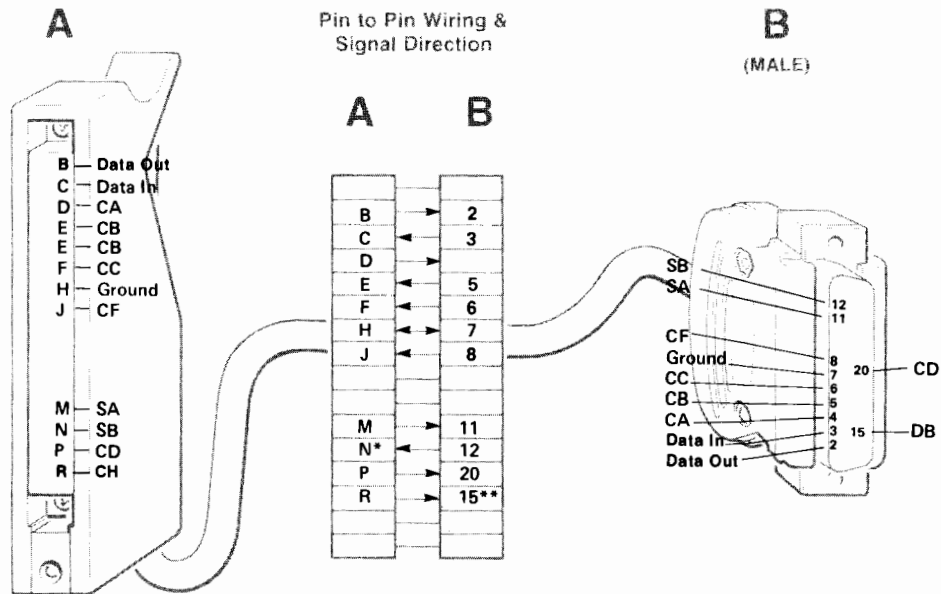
13232 Cable Assemblies (Sheet 3 of 3)
